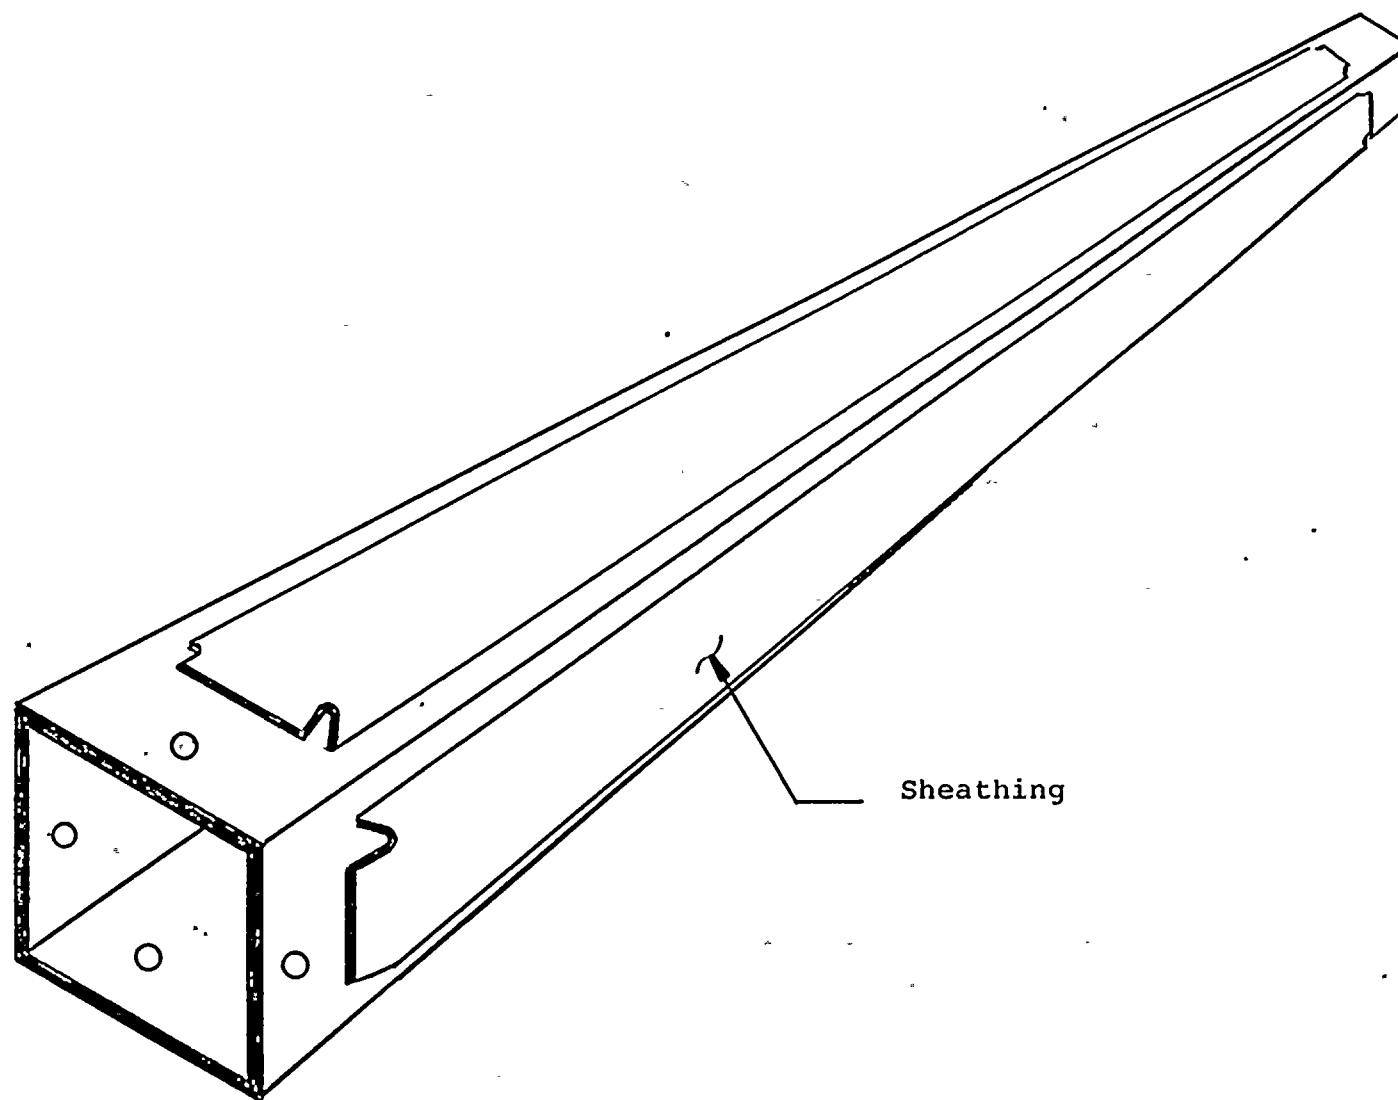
COMPOSITE BOX ASSEMBLY
